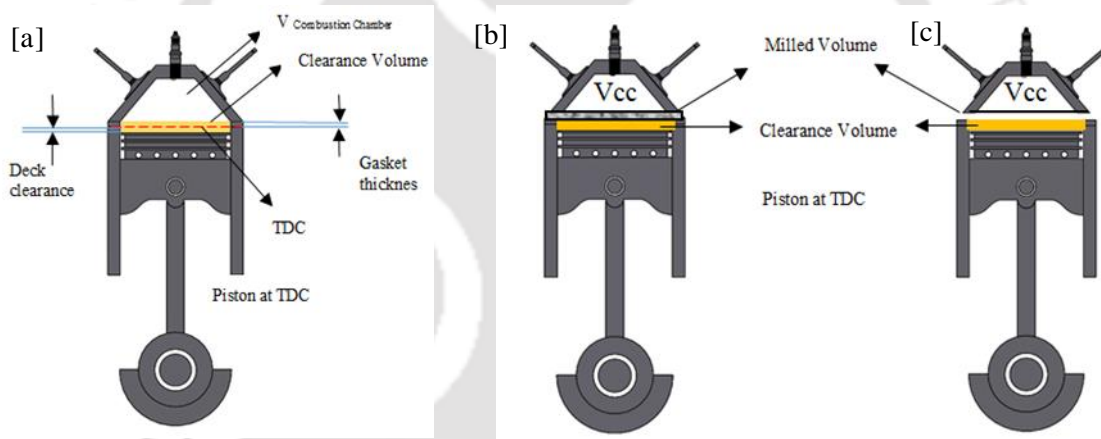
24: Lay out of the engine cylinder and head assembly (a) Honda GX 200 engine with CR 8.5; (b) Honda GX 200 with milled GX 160 engine head; (c) Retrofitted GX 200 engine with CR 9.53
